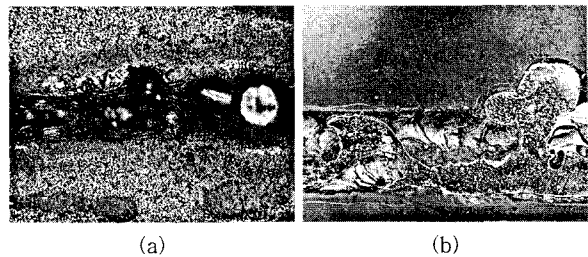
Weld defects for autogenous laser lap welding of zinc-coated steel sheets : (a) Top view of weld, (b) Longitudinal cross-section
